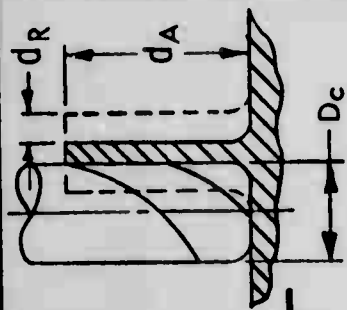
STIFFENER TEST SPECIMEN NO. 51, 1 1/2 INCH DIAMETER CUTTER - ALUMINUM
